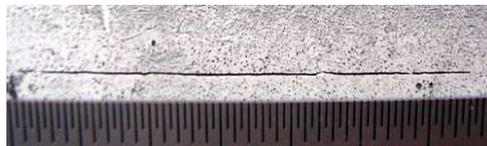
Linear Indication Along Electrical Resistance Weld (ERW)
